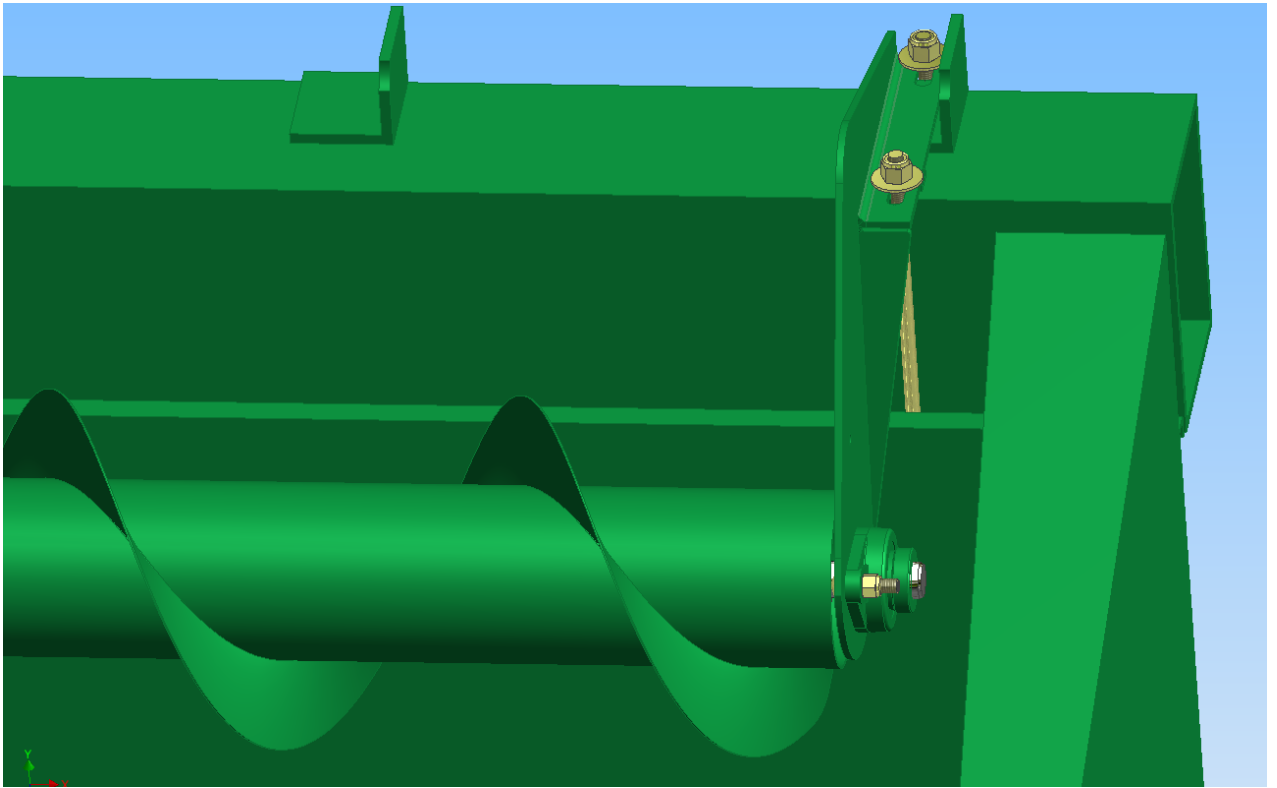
LH END MOUNT INSTALLED ON TOP OF HEADER ANGLE
